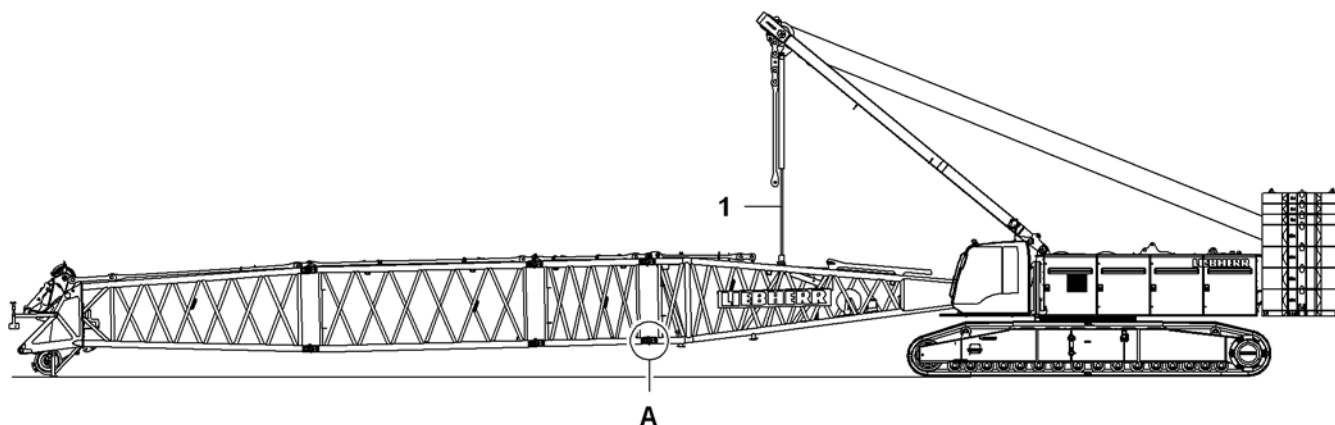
Bolting the boom base section to the main boom at the bottom
